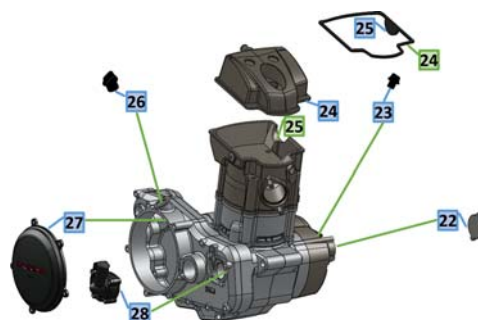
Exploded view for the second set of disassembly operations found by the best-first search algorithm (consisting of the removal of the outer parts)
